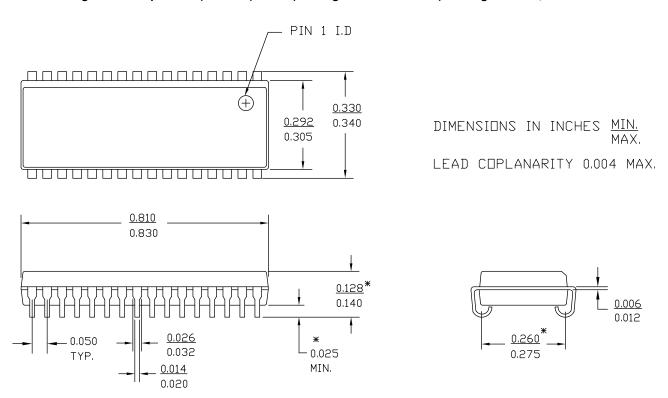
32-pin SOJ (400 Mils) V32.4 (Molded SOJ V33) Package Outline, 51-85033
